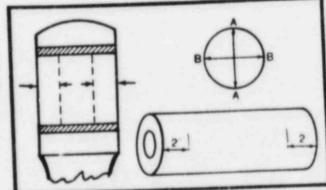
C-8. Measuring Piston Pin In Bushing Clearances
